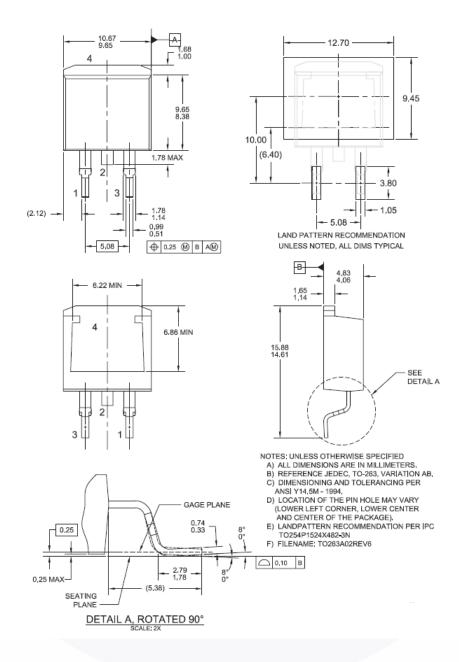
TO263 (D<sup>2</sup>PAK), Molded, 2-Lead, Surface Mount
